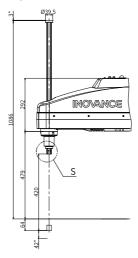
Dimension drawing of upper and lower limit positions of J3 axis of IR-S20
